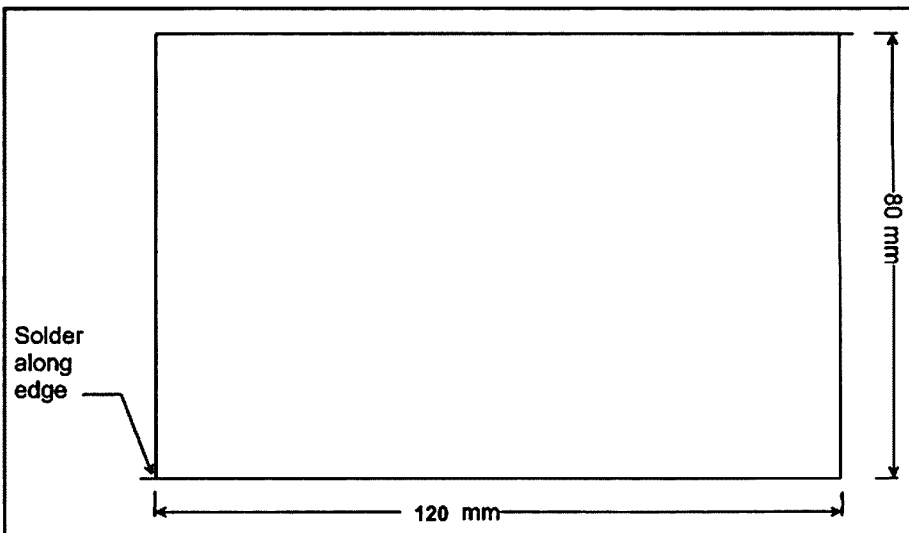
Brass shield enclosure. Note that the two pieces of brass sheet will need to be soldered at diagonally opposite corners.
